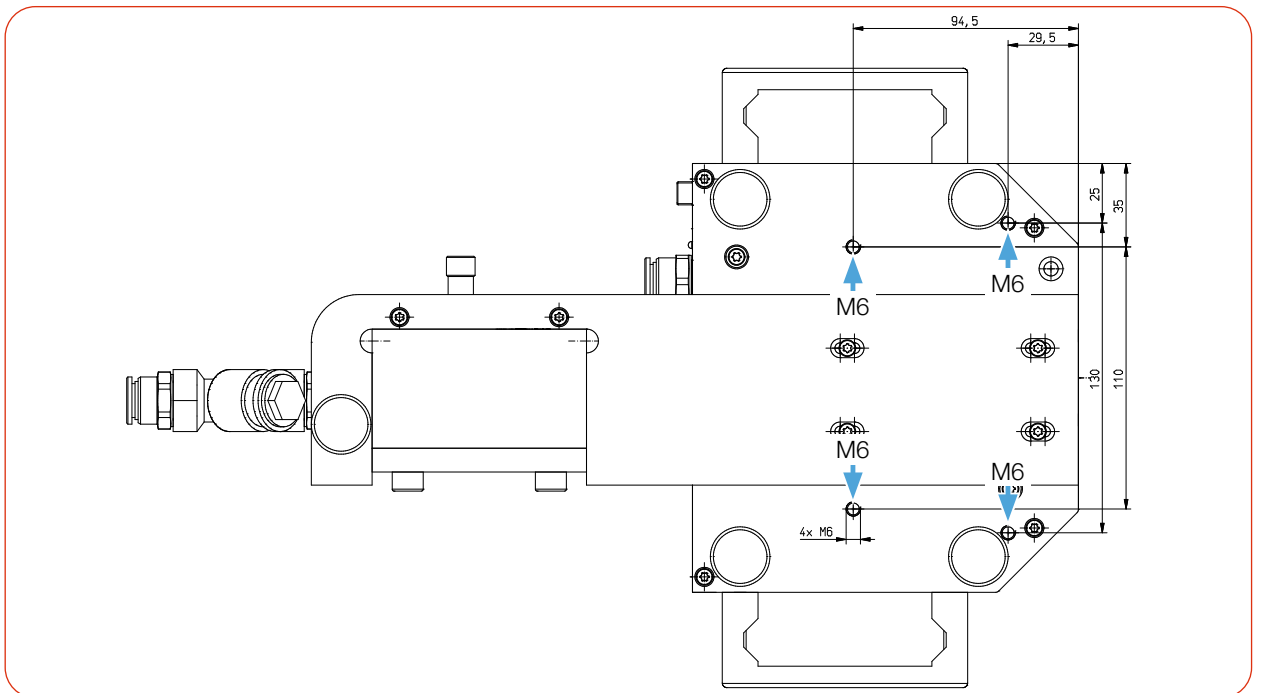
Mounting threads M6 in the bottom of the housing of the CPM F-20 with oval wheel meter (dimensions in mm)
